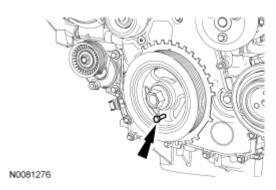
Identifying 6 mm x 18 mm Bolt Courtesy of FORD MOTOR CO.
